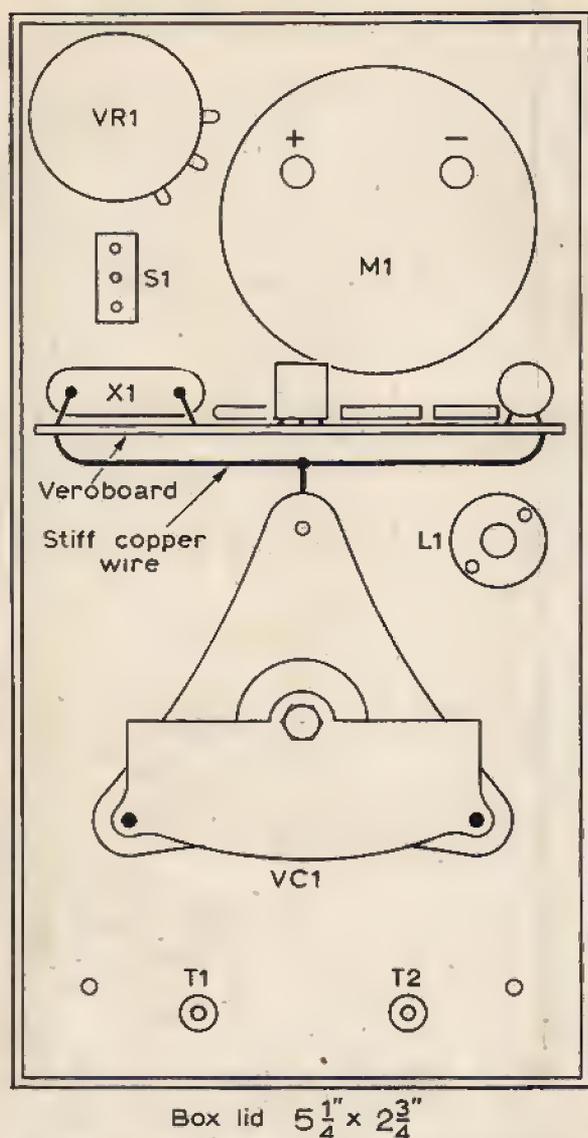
Layout of the checker Mk II. In the Mk I version the circuit board and switch S1 are omitted and an input socket fitted.
